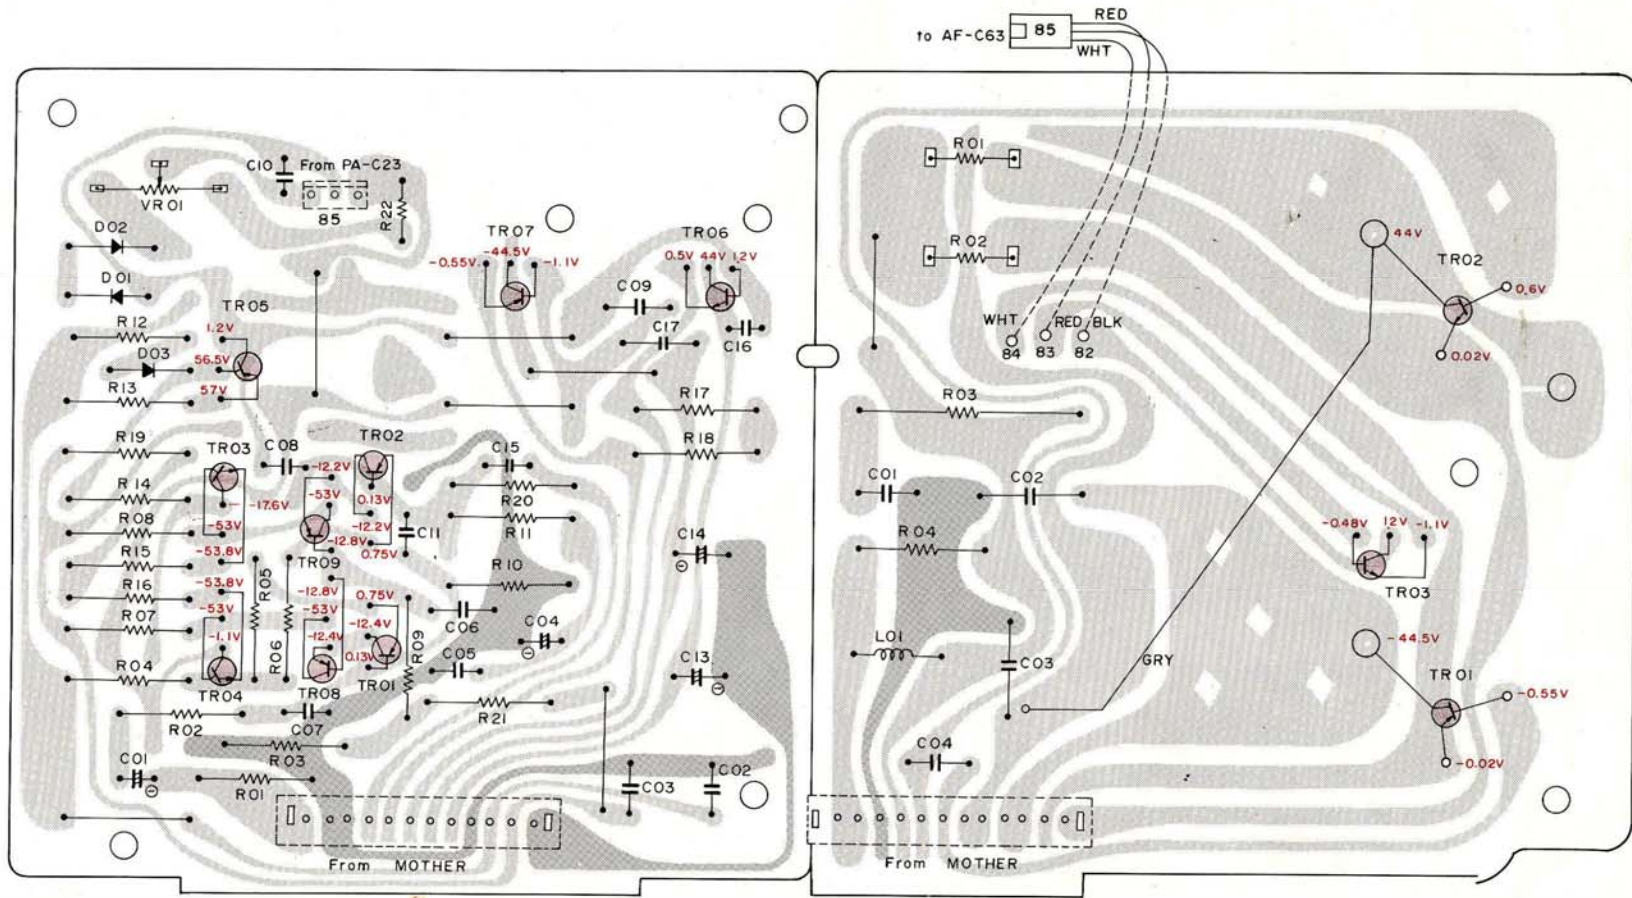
Solder Side of Driver Amplifier P.C. Board (AF-C63) & Solder Side of Power Amplifier P.C. Board (PA-C23)
